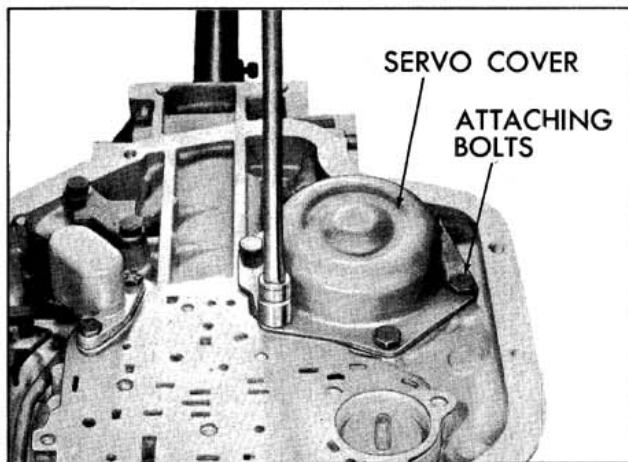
Removing Rear Servo Cover Attaching Bolts
